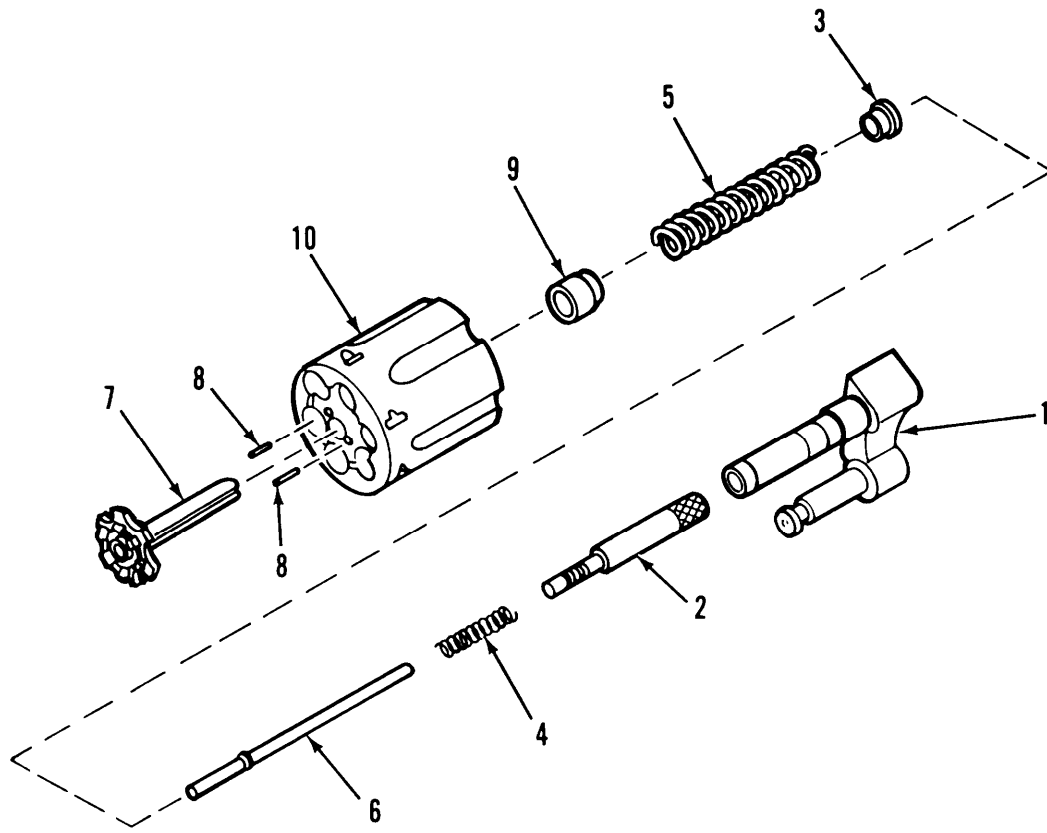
Cylinder and Yoke Assembly (Smith and Wesson)
